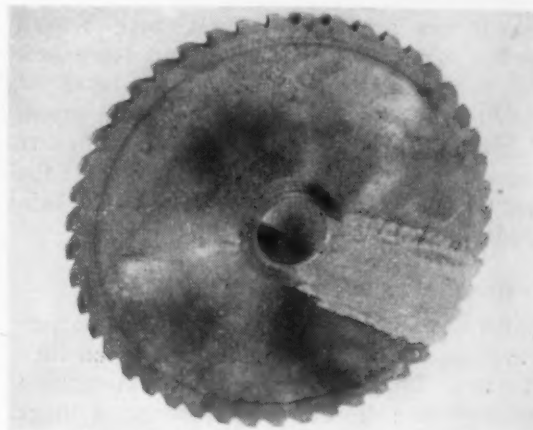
Slitting saw repaired by welding. Two cracks, extending from keyway to teeth, were welded. Skip-welding kept heat to minimum so there was no annealing of teeth.
